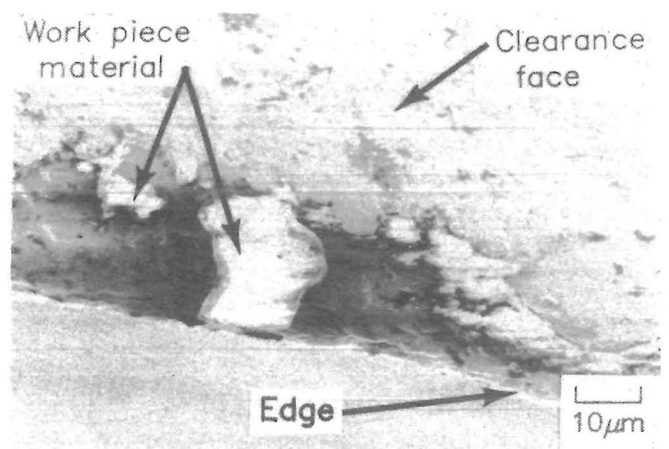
Failed high-speed steel end mill. Note material welded to edge of tool.
